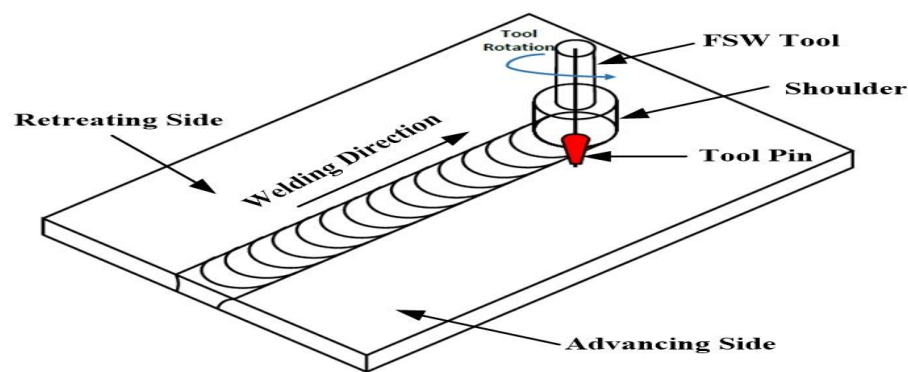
Principle of friction stir welding process (adapted from Banjare et al., 2017)
